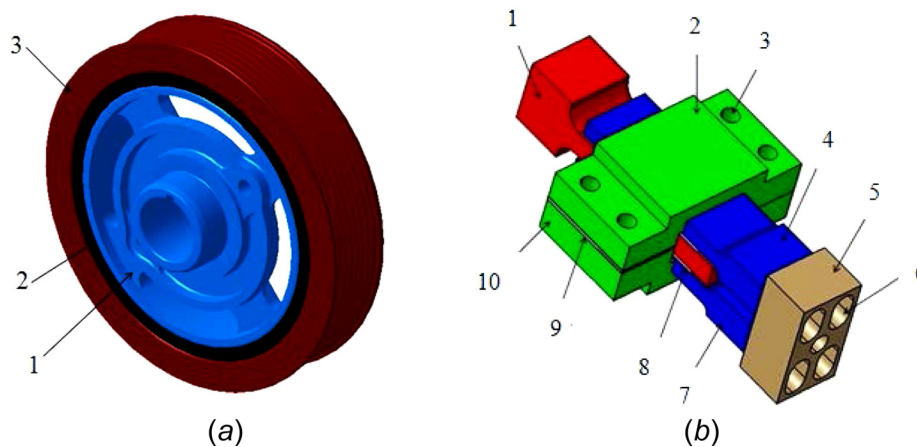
(a) Rubber-damped TVA for an engine crankshaft and (b) fixture for measuring shear properties of a rubber specimen (1-moveable block; 2,10-clamping plates; 2,6-fastening bolts; 4,7-locking blocks; 5-intermediate block; 8-rubber specimens; 9-gaskets)
